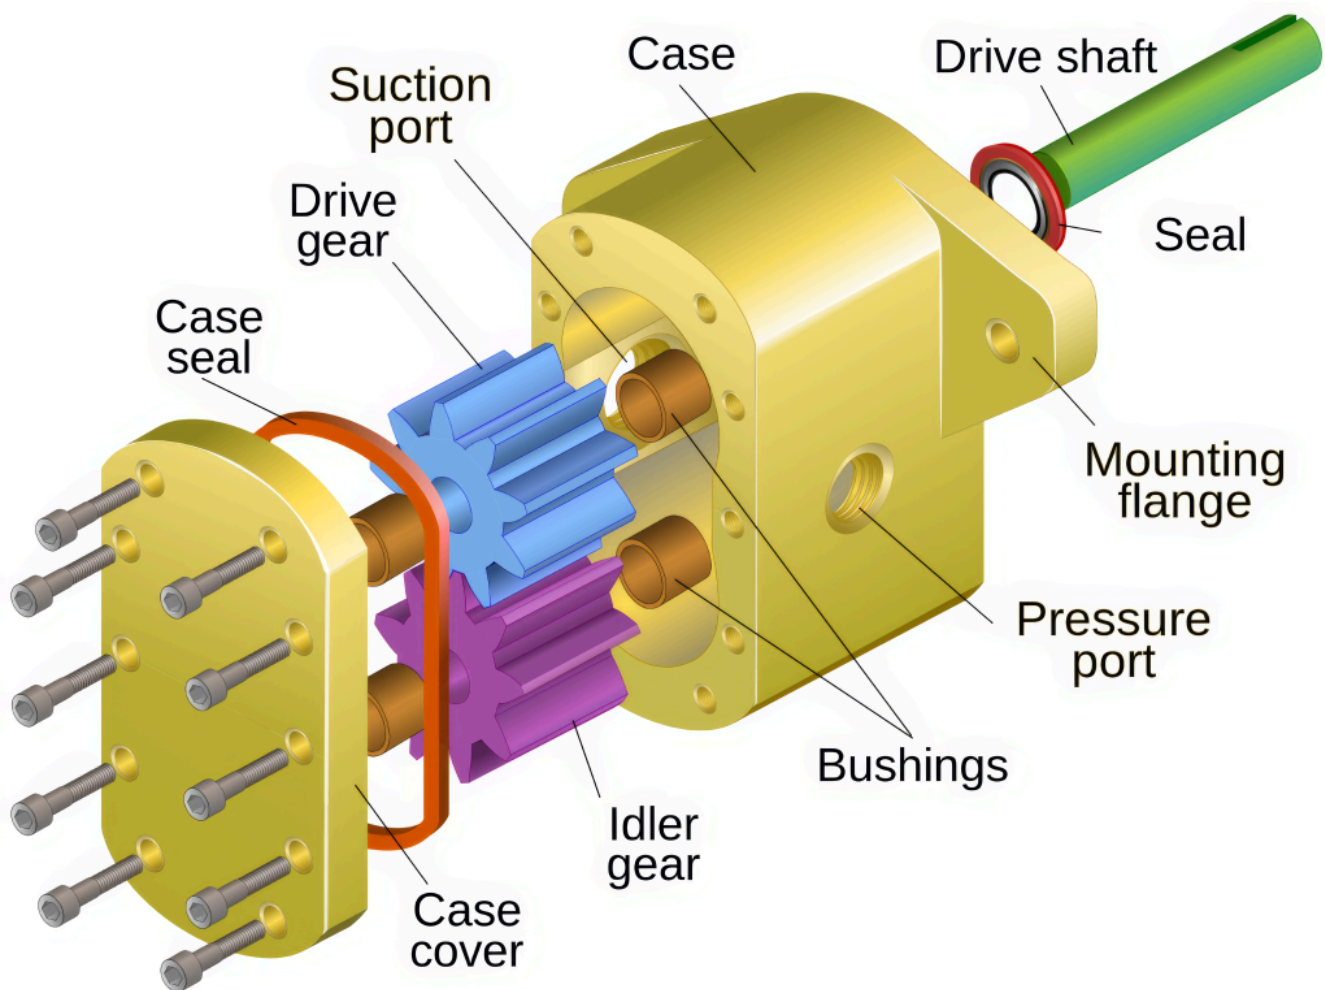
An exploded assembly drawing provides a view of the assembly components.
